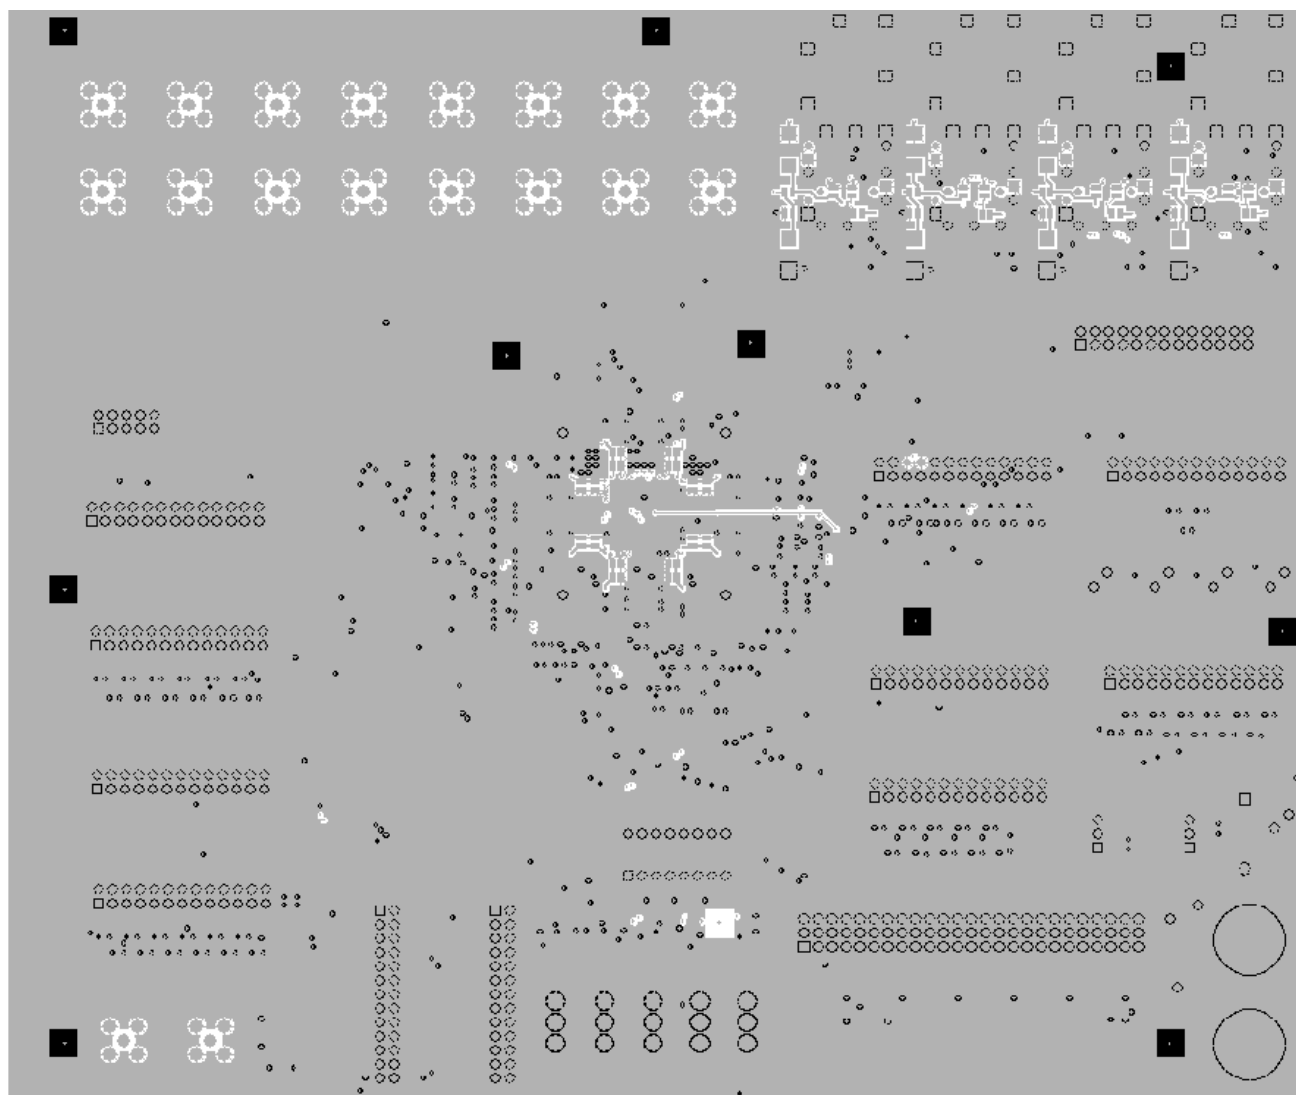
CYP15G0401DXB Eval Board Bottom Layer Layout
